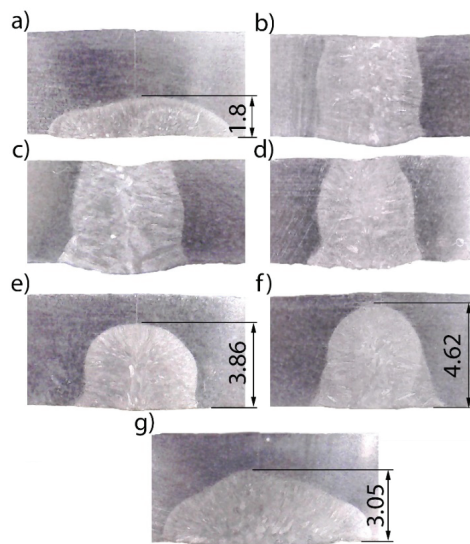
Macro-images of welds in the bottom position of the pipe.
